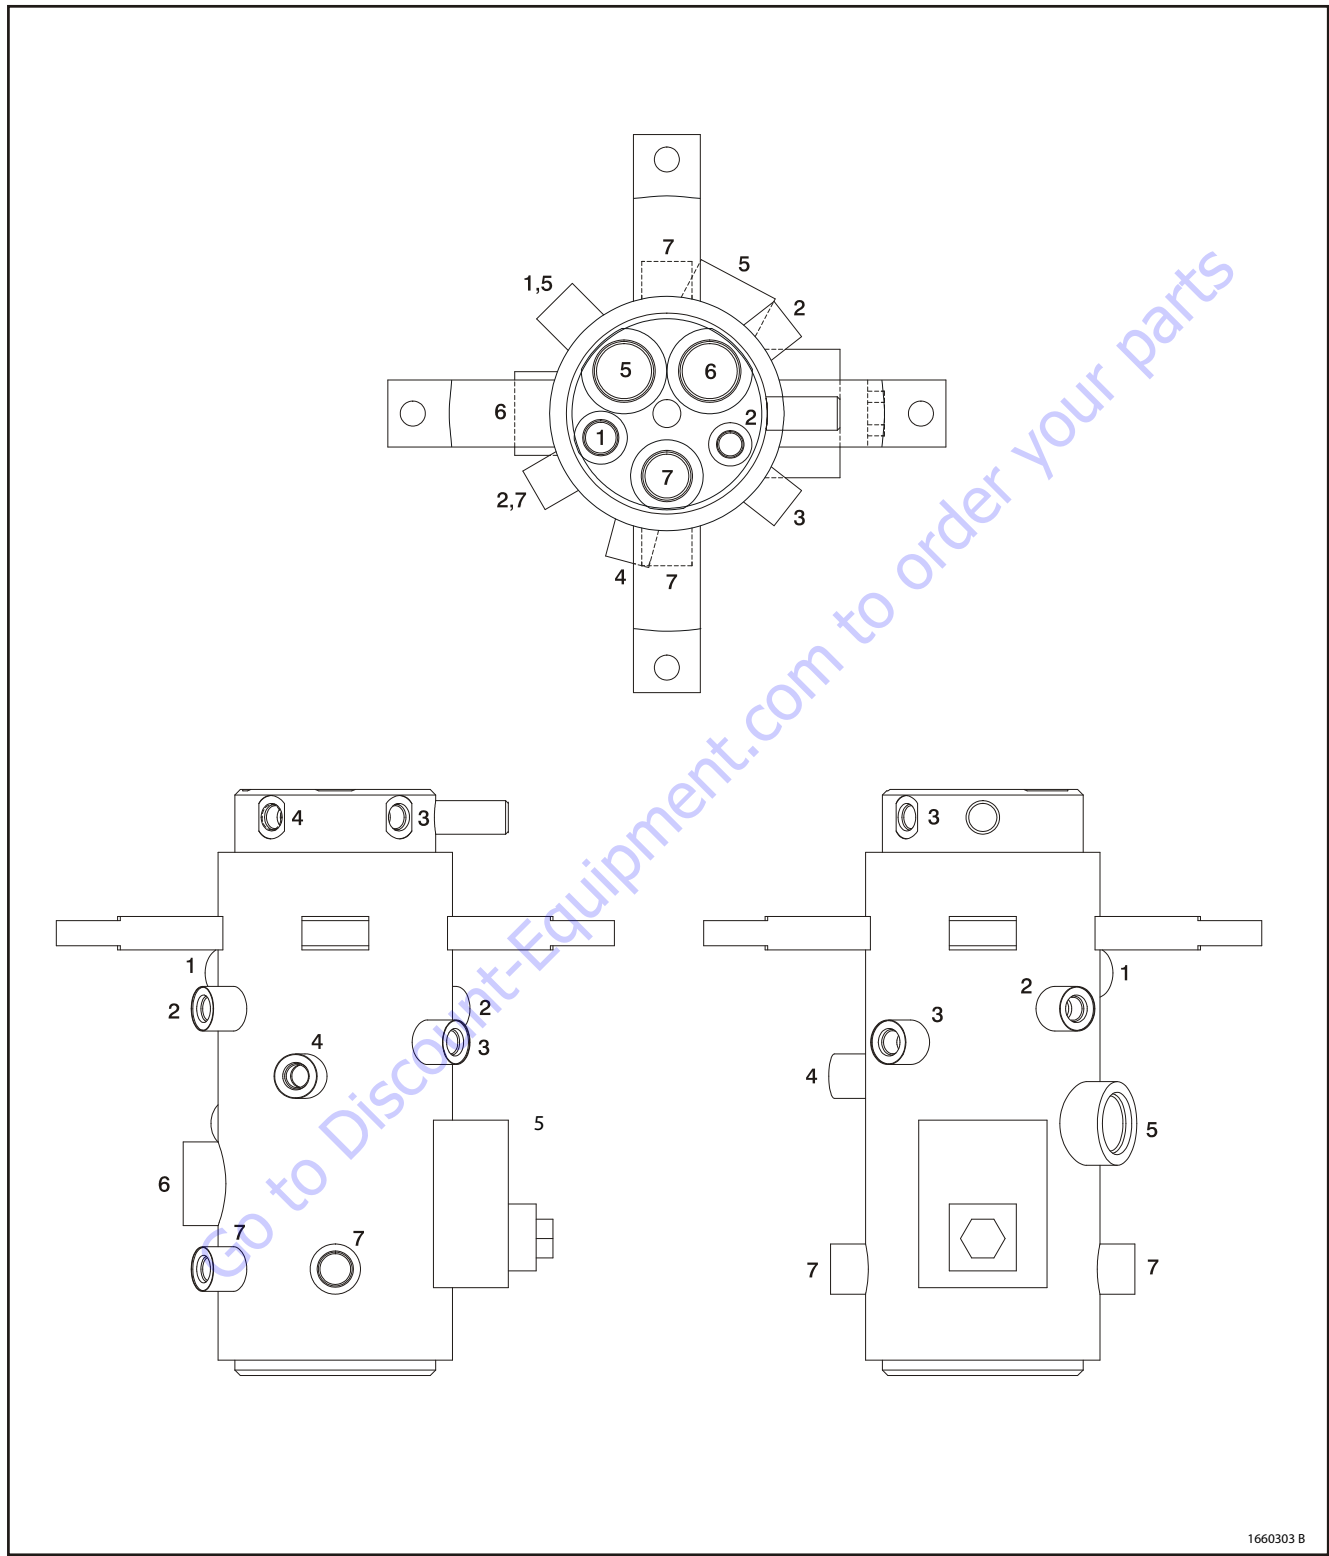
Rotary Coupling Port Location (USA Built Machines, SN 0300087000 through 0300138648) - 2WS
